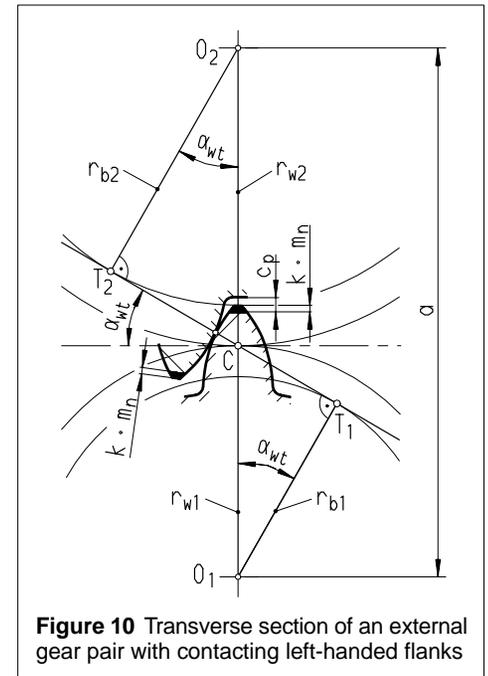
Transverse section of an external gear pair with contacting left-handed flanks
